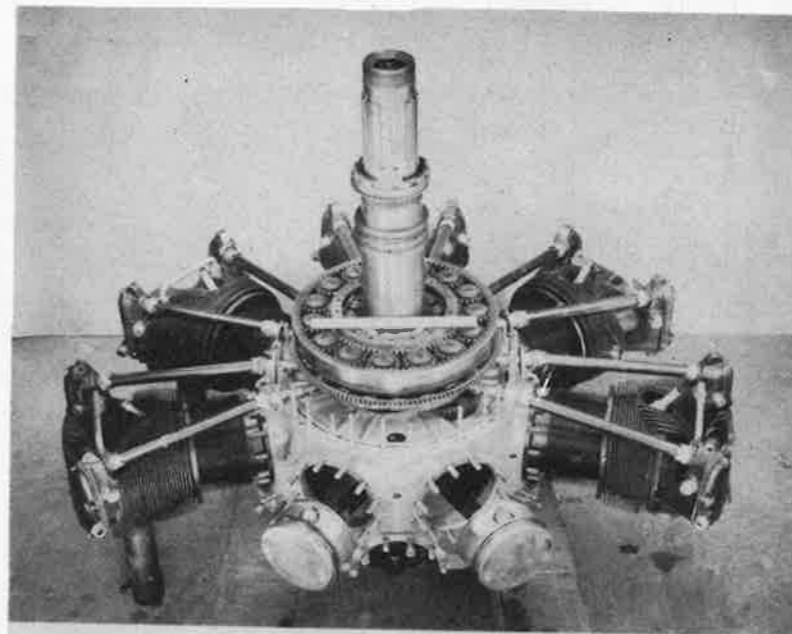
Front Power Section of Twin Bank Radial Engine Showing Reduction on Gear and Propeller Shaft (CEE-2963). 29030
